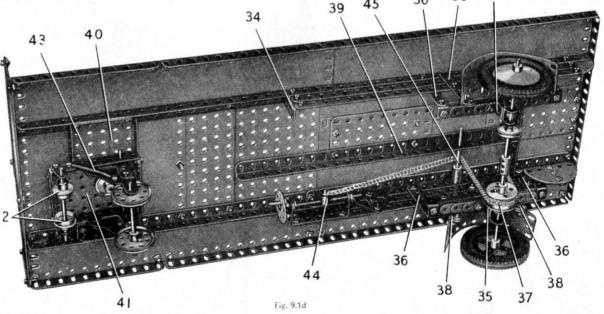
DETAILS OF THE COUPLING UNIT AND SUPPORTING WHEELS
